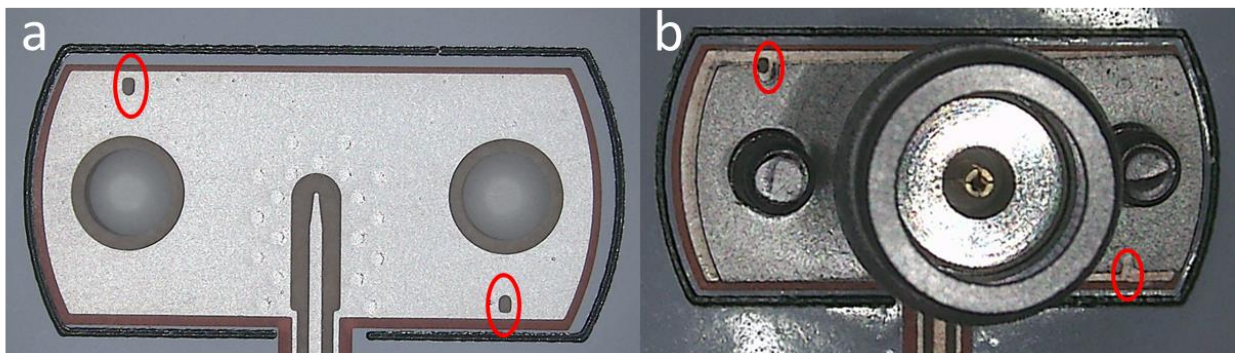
A) PCB with copper defined features for alignment. B) Connector with notches aligned to PCB alignment features
